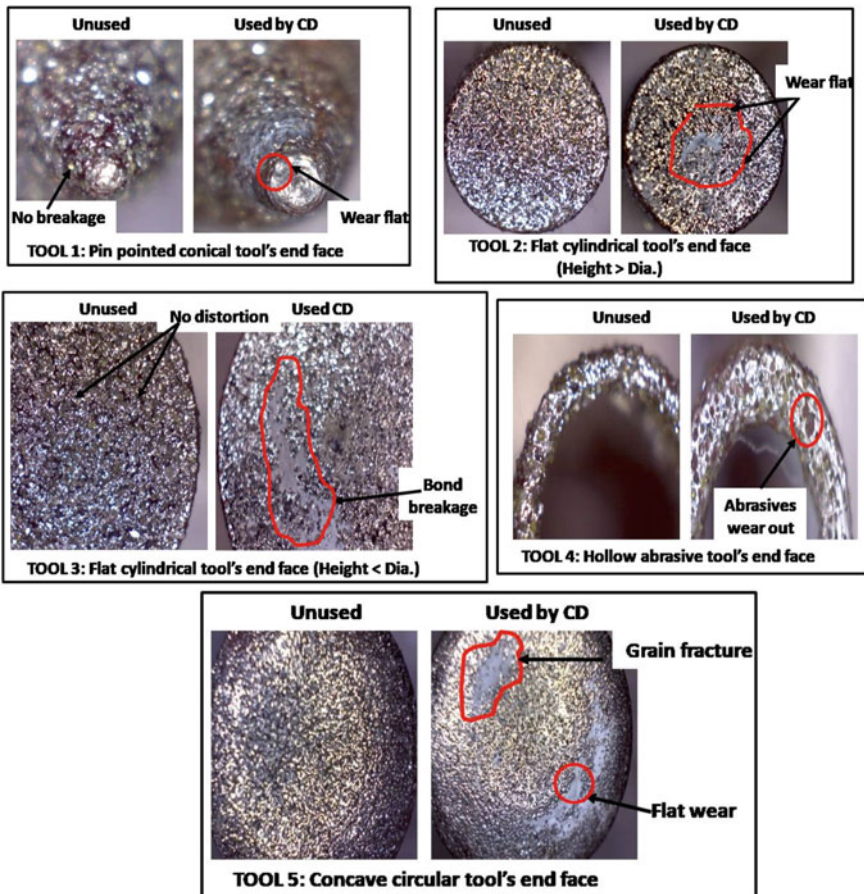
Microscopic images of the end face of all the tools: a unused, b used by CD
